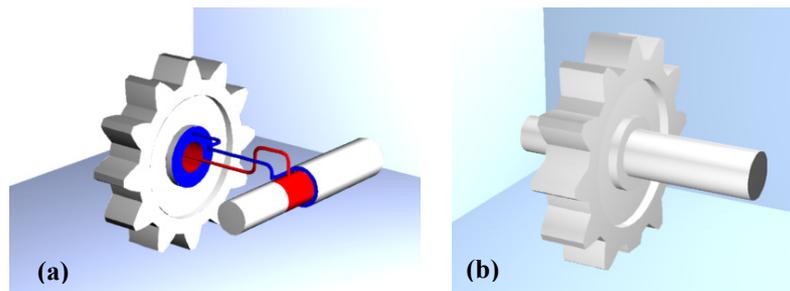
a) The archetypes of shaft and gear with functional surfaces. b) The assembly of two components.
